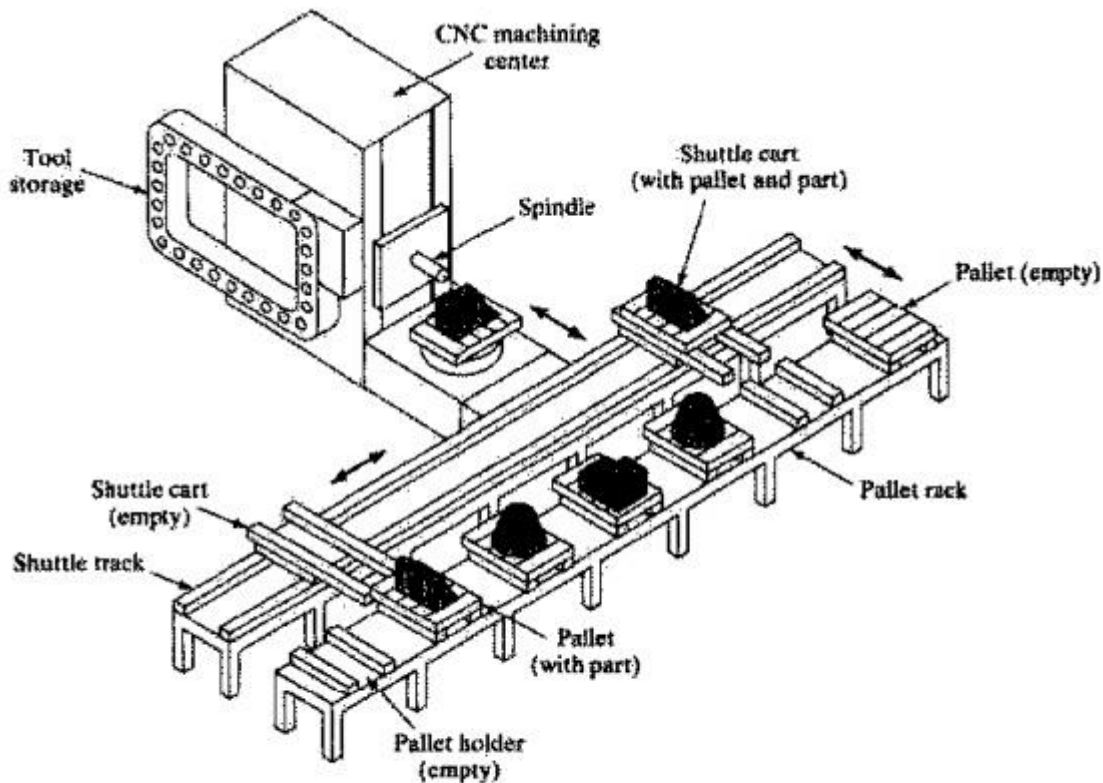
Single machine cell consisting of one CNC machining center and parts storage unit.
